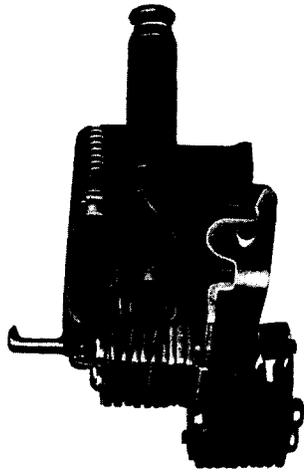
Exclusion Key Assembly Removed from Set (Key in Operated Position)
